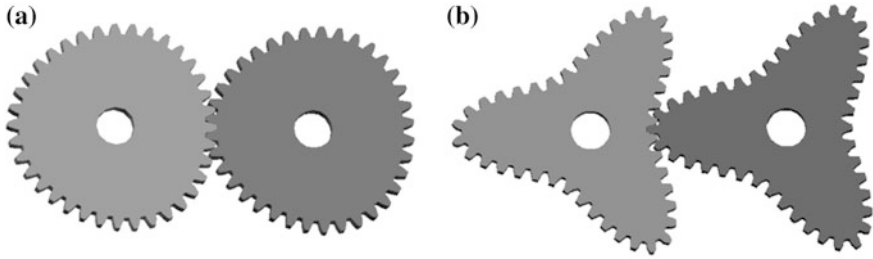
Variable speed gears generated by rack cutter (a) and shaper cutter (b)
